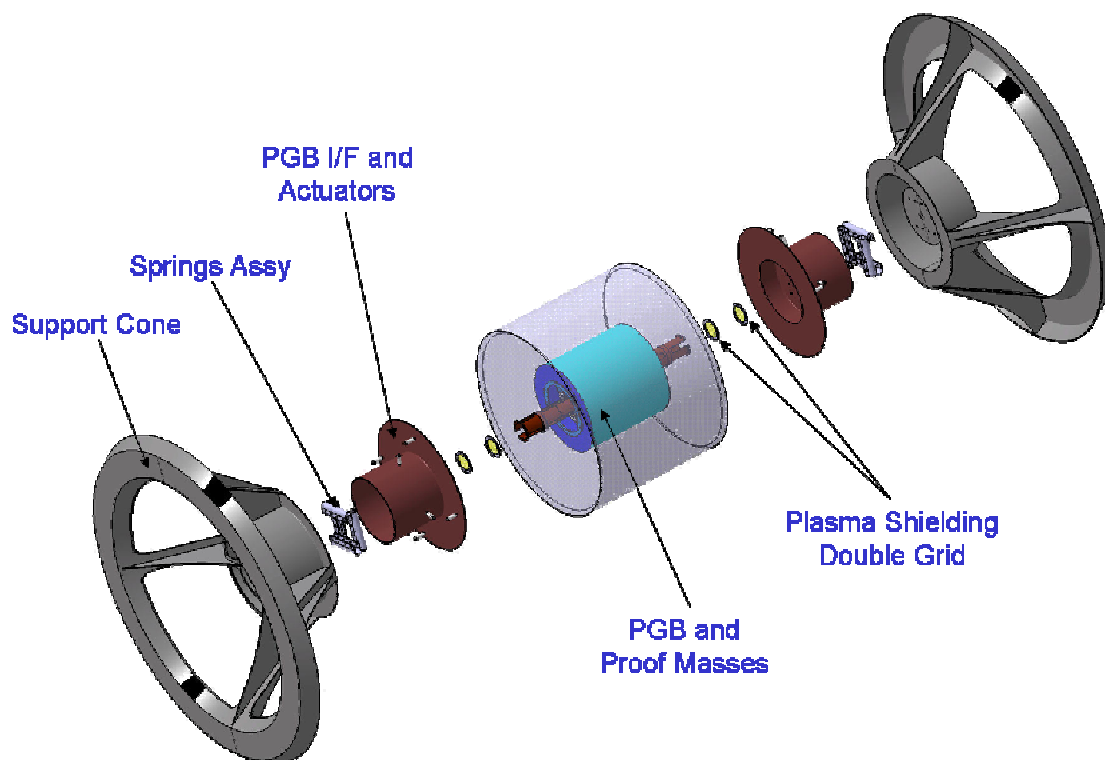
PGB interfaces with GG Spacecraft exploded view
